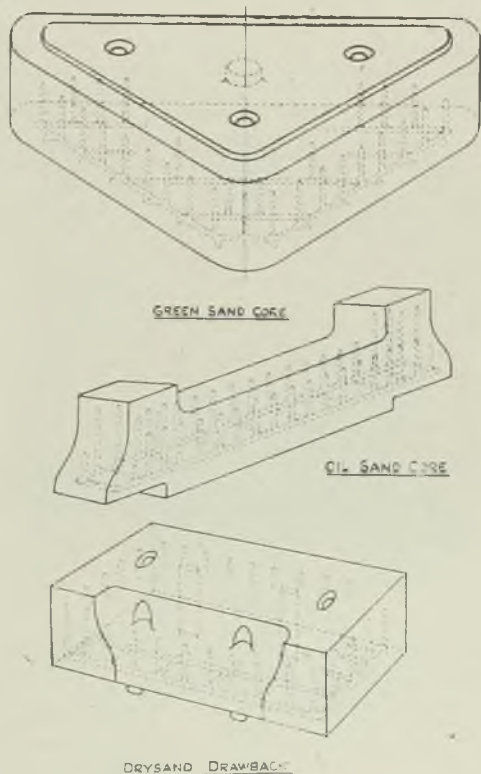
CORES AND DRAWBACK FOR MACHINE-TOOL BED.
